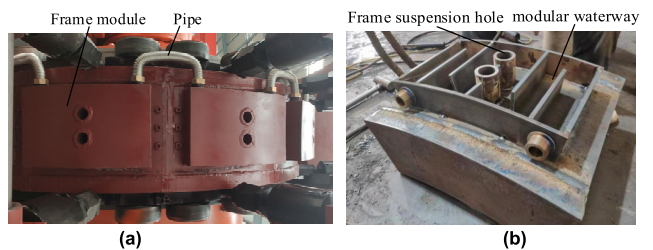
Modular frame of prototype: (a) frame; (b) cooling channel.
